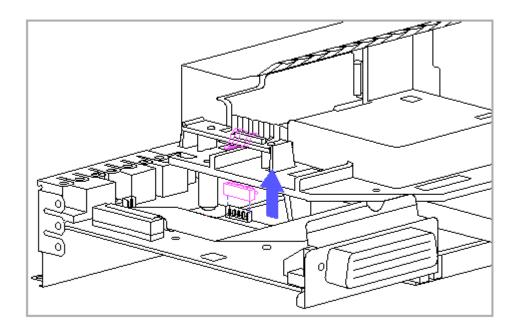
Disconnecting the Battery Contacts Board Connector
